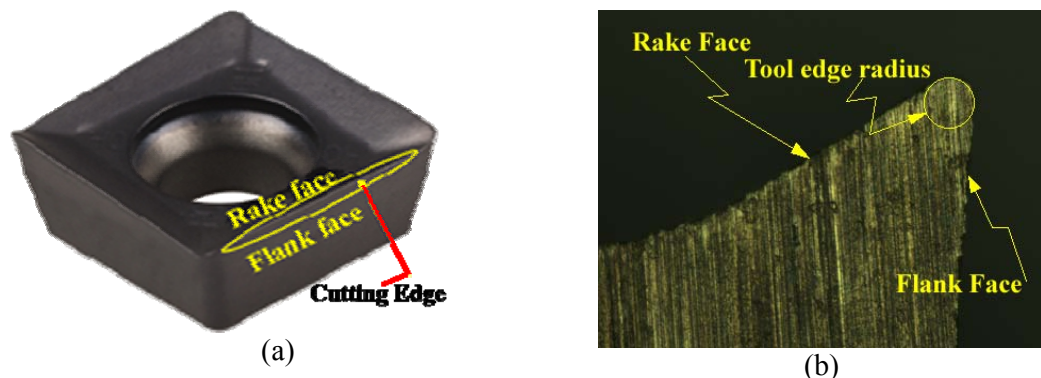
a. Image of ISCAR’s insert, IC928; b. Tool edge radius
